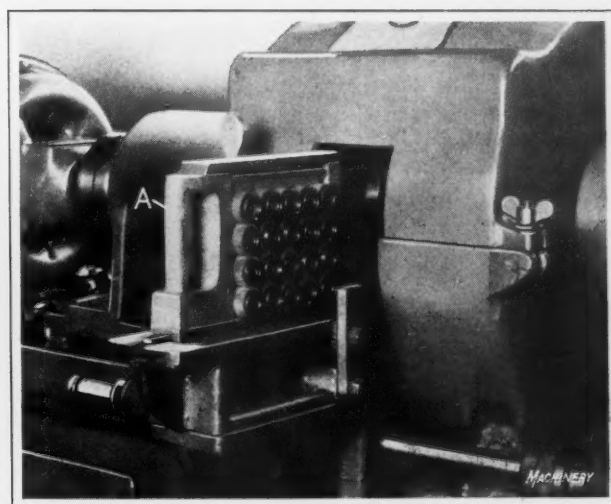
Enlarged View of Work-holding Fixture used on Machine illustrated in Fig. 8
